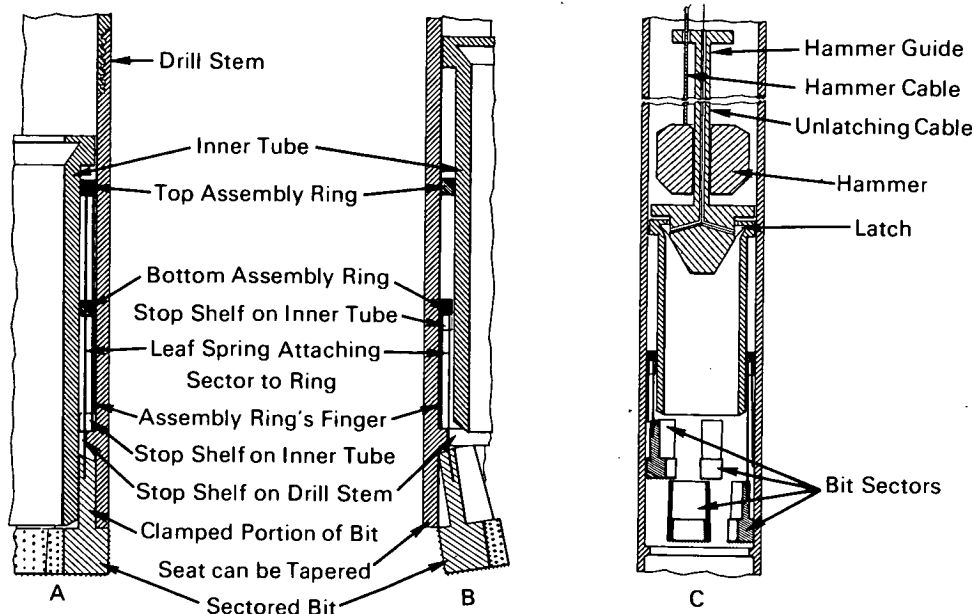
A, Bit Locked for Drilling; B, Beginning of Removal; Sector Sprung Inward. C, Hammer Mechanism and Bit Assembly Sliding through Drill Stem.
